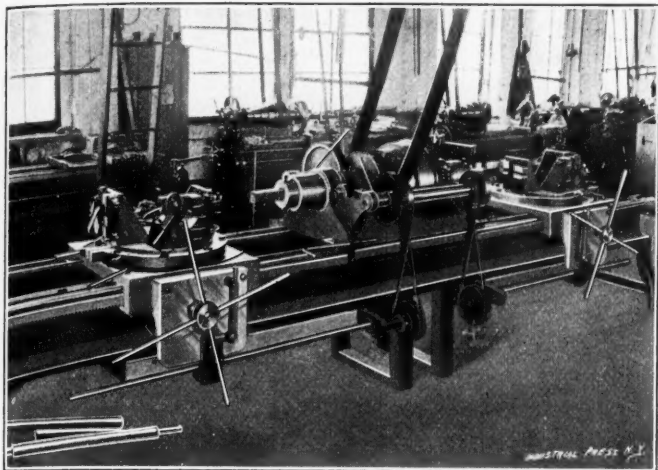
Old Lathe Rebuilt for Turning Axles.
